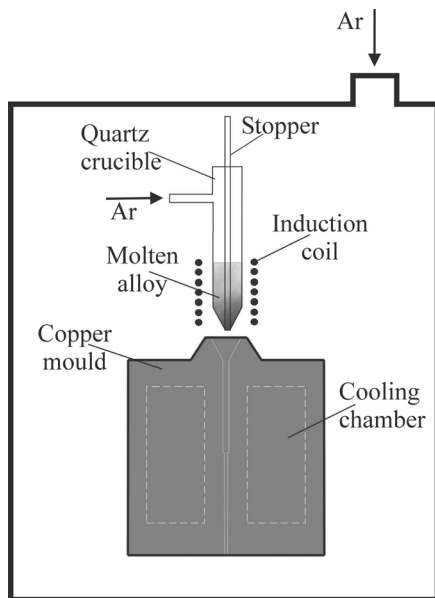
Schematic illustration of the pressure die casting equipment used for casting bulk amorphous rods [12,24,25]
